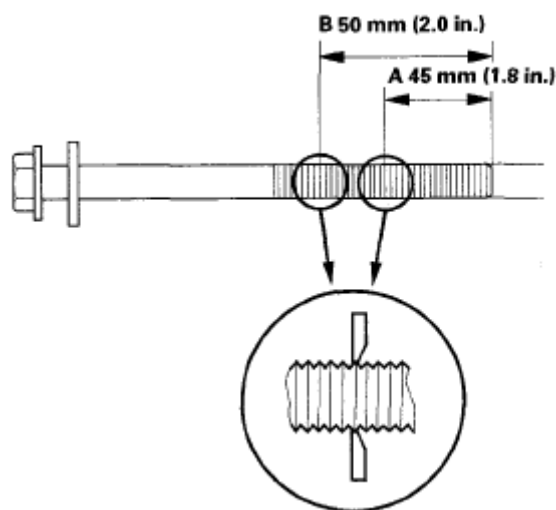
Measuring Diameter Of Cylinder Head Bolt
